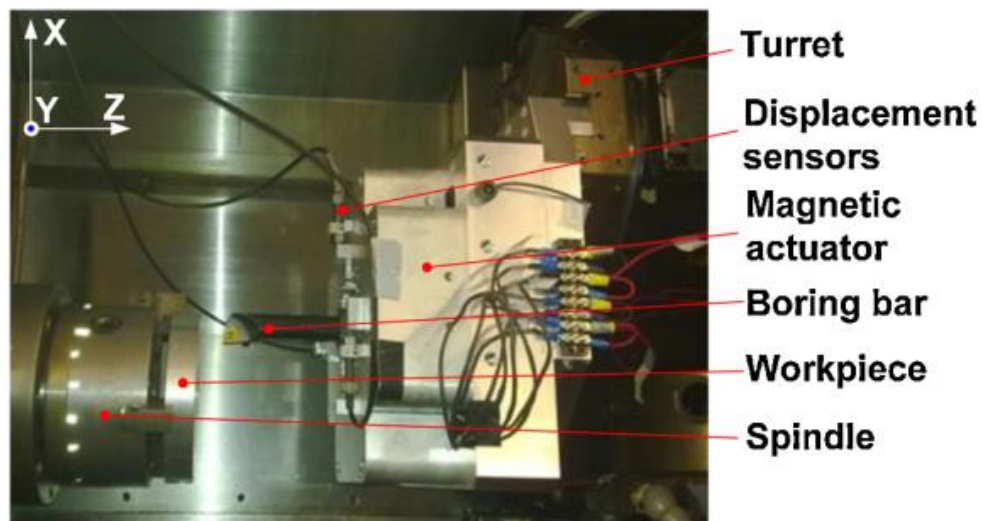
Magnetic actuator mounted on lathe turret [10].
